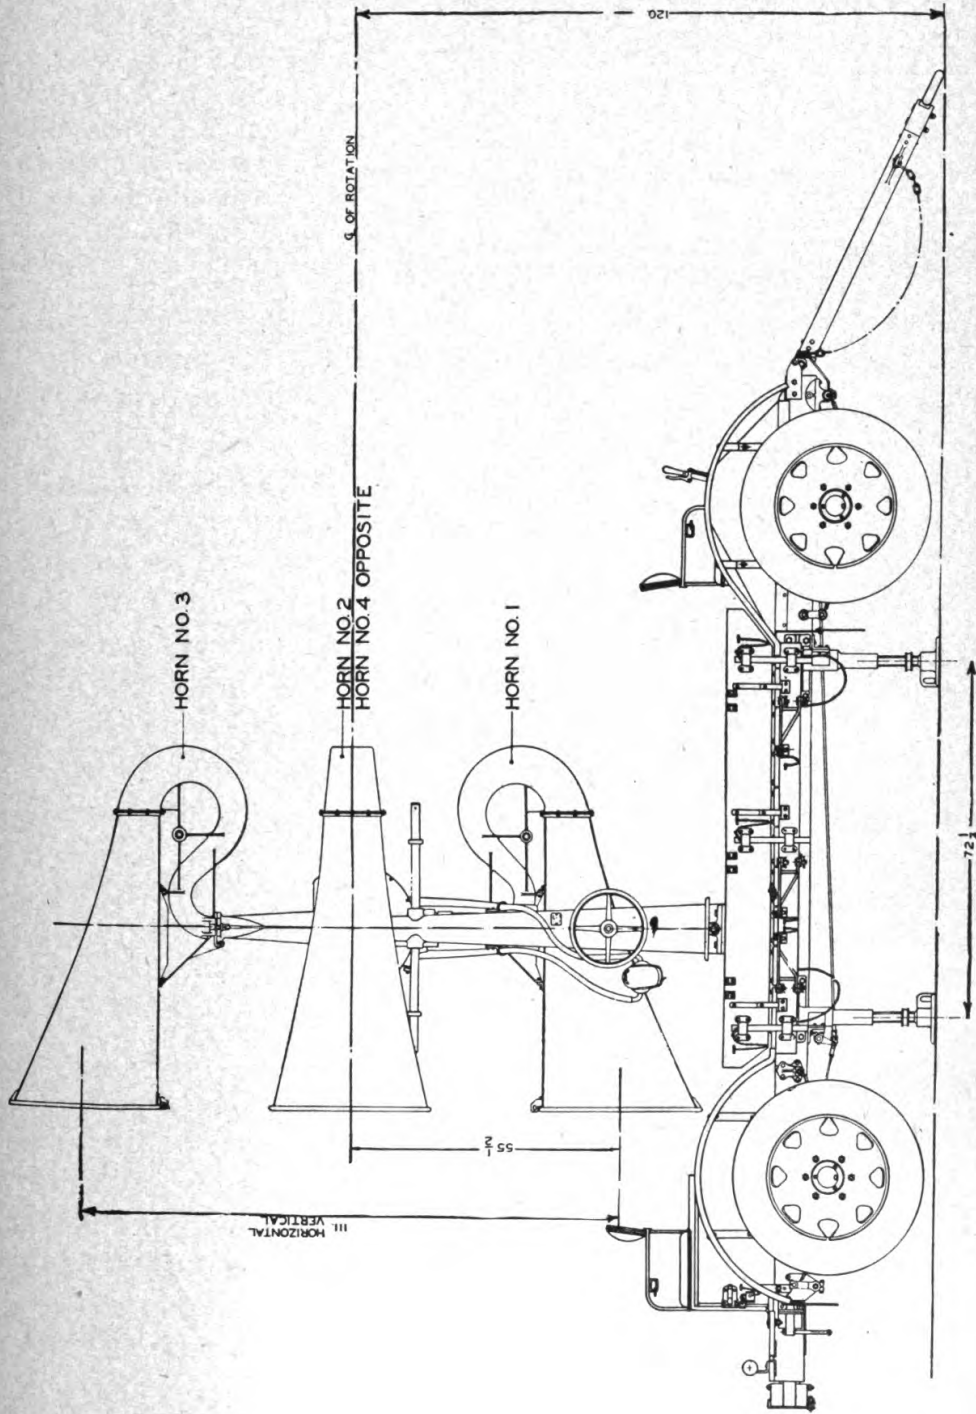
Sound locators, M1A4 and M1A6, complete in operating position—assembled view.
